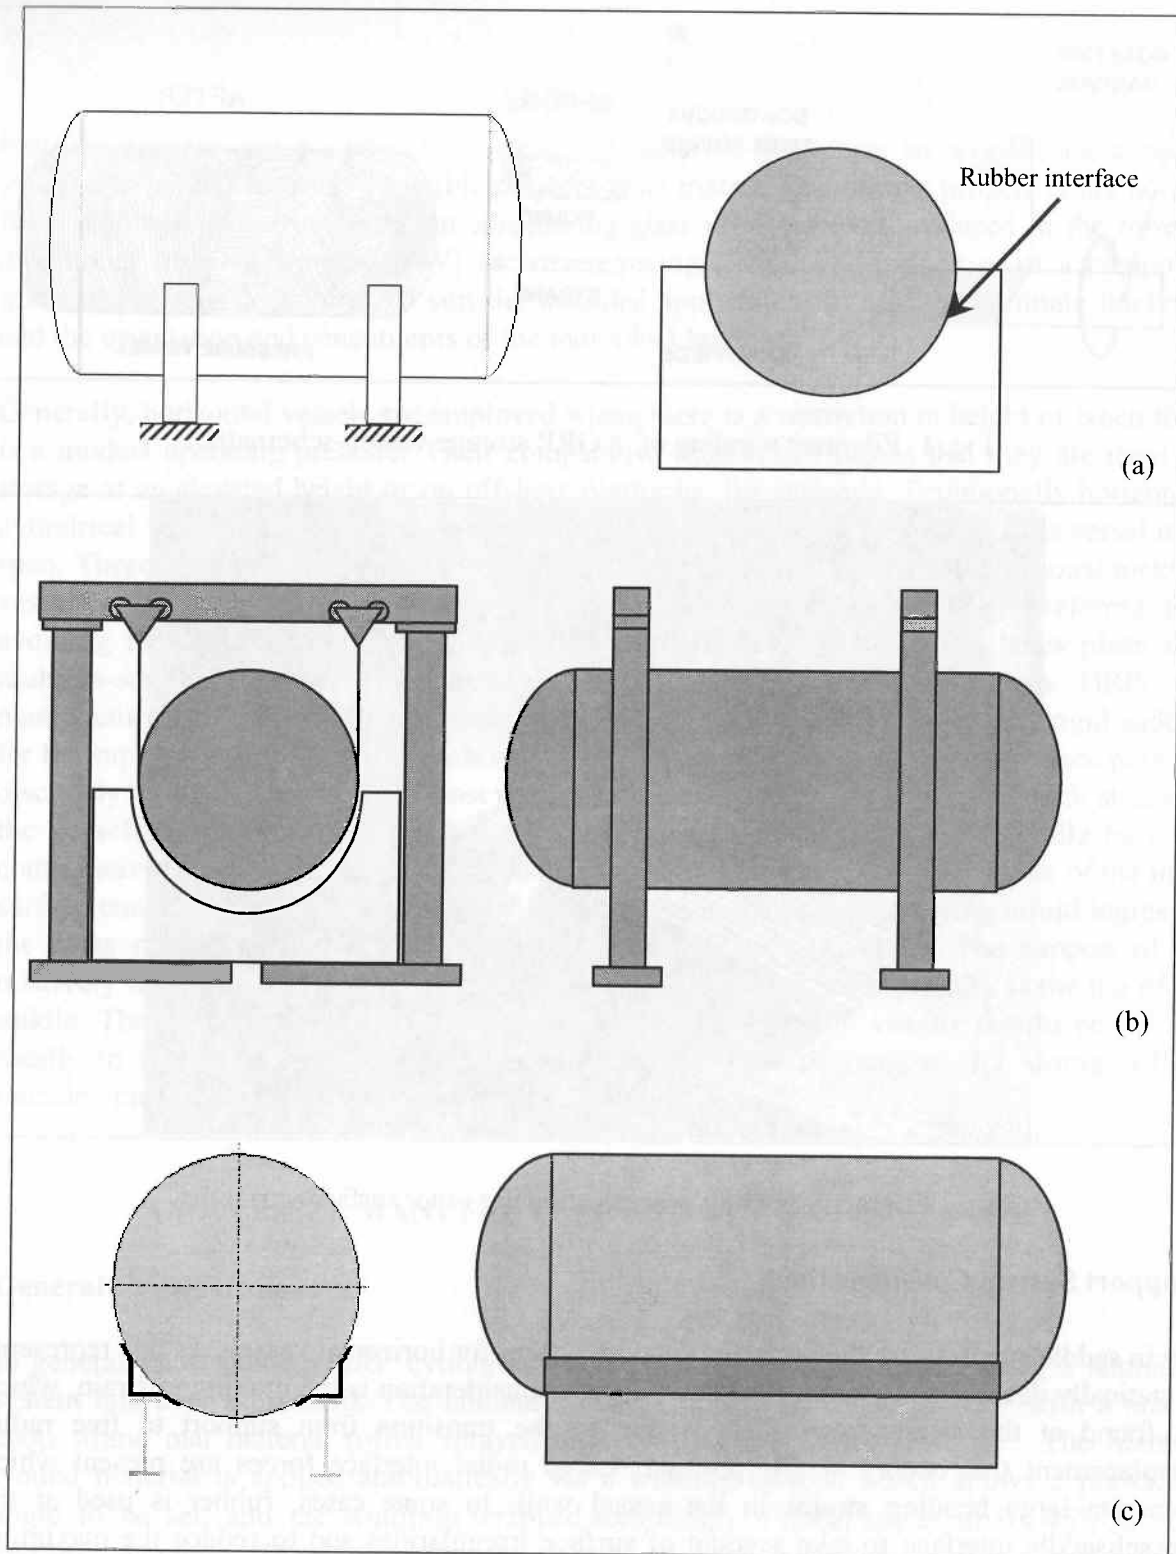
Support arrangements a) Twin-saddle b) Sling-strap & c) Longitudinal beam
